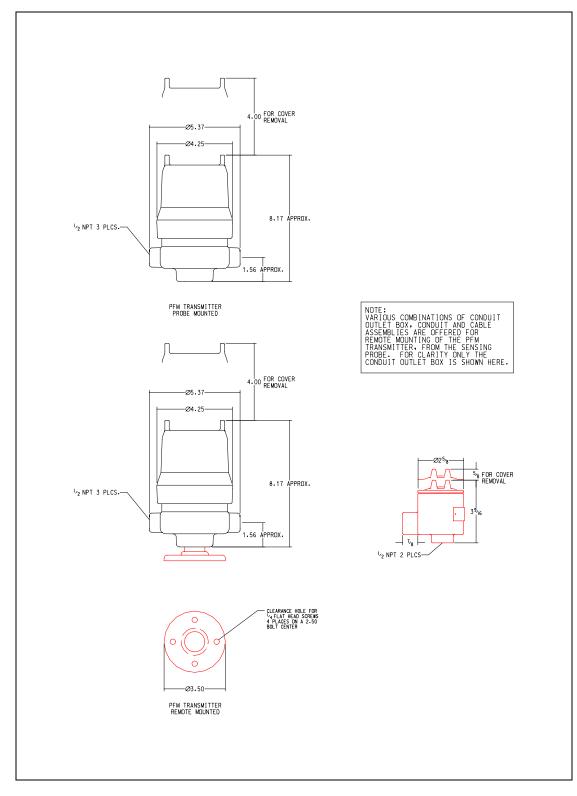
Dimensions PFM Transmitter and Probe Mounted Conduit Outlet Box
